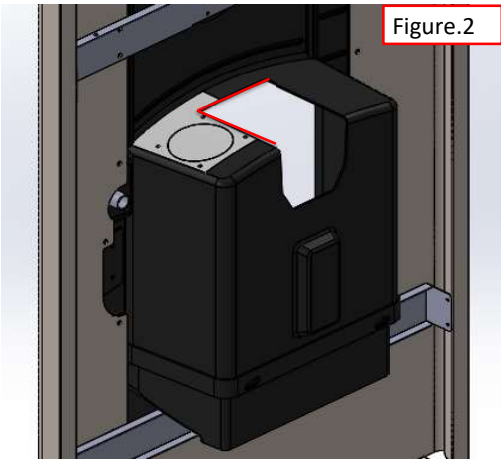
Place hole cutting guide paper on FRONT COVER MOLDING like left drawing.
